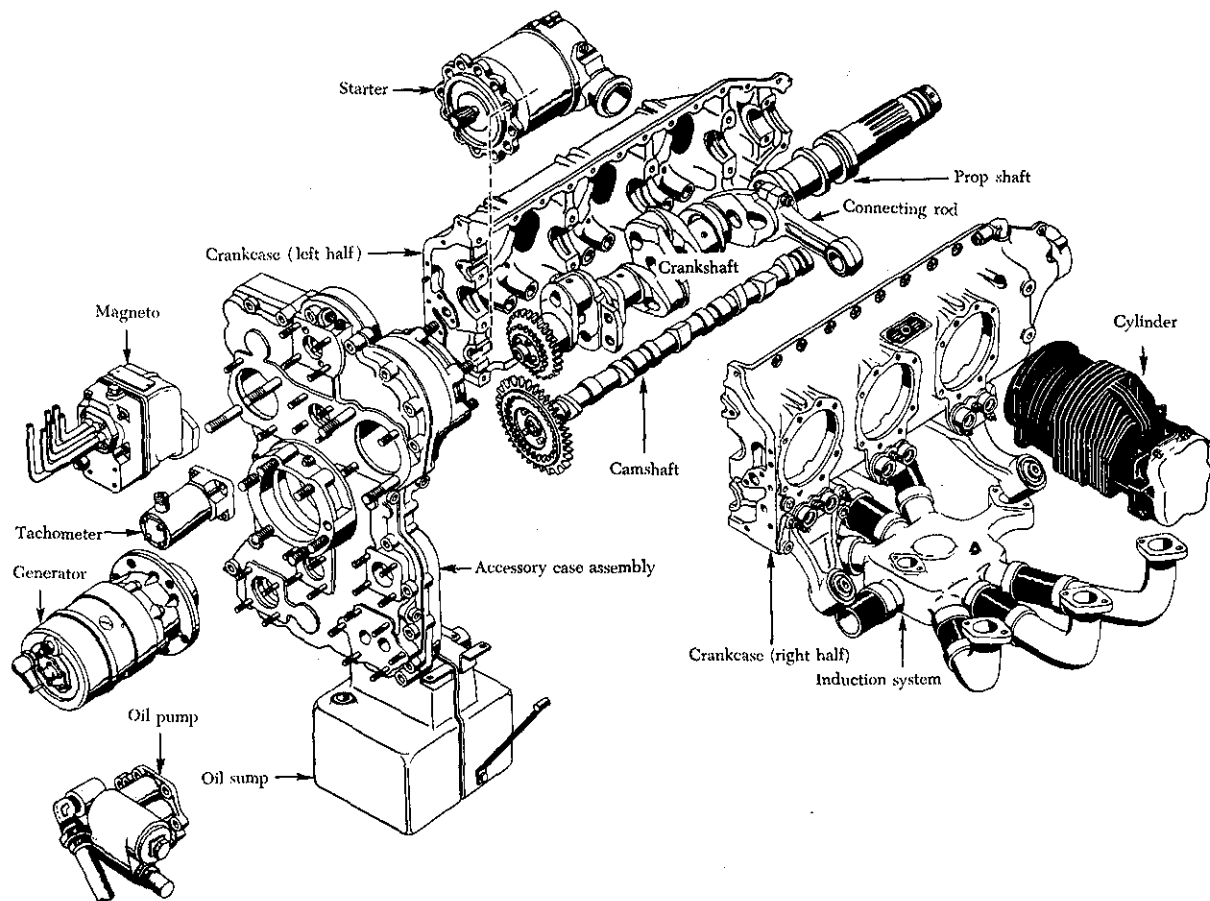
Typical opposed engine exploded into component assemblies.
